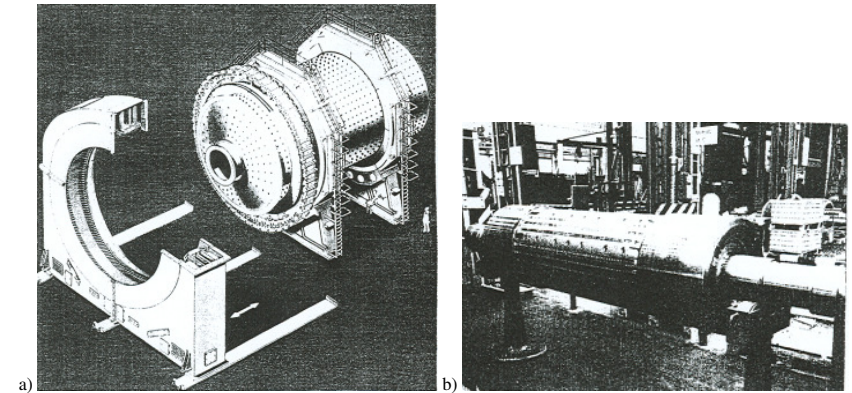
1; Synchronous direct drives (without gear box): a) ring motor as a revolving cement furnace drive, b) turbo rotor of a fast turning compressor drive (Source: *Siemens*)
